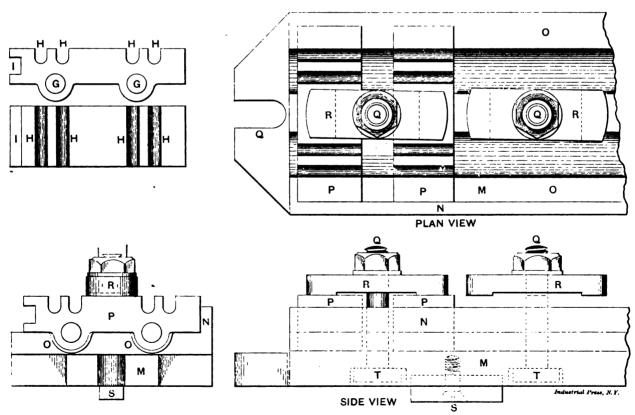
Plan, Side and End Views of Fixture Used in Milling Piece shown in upper left-hand corner of this Figure.
